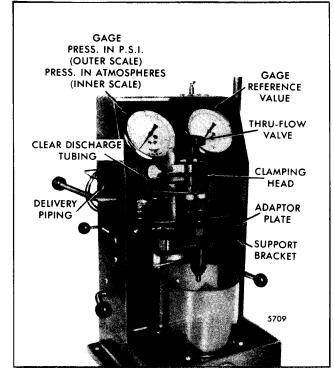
Injector Installed in Tester J 23010 with clamping Head
